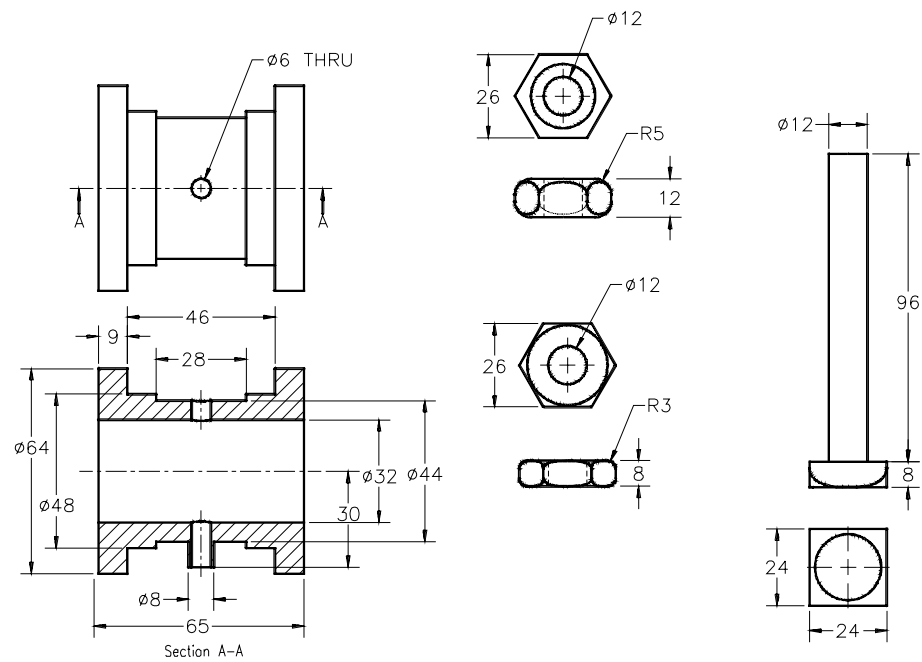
Views and dimensions of Brasses, Nut, Lock Nut, and Bolt
